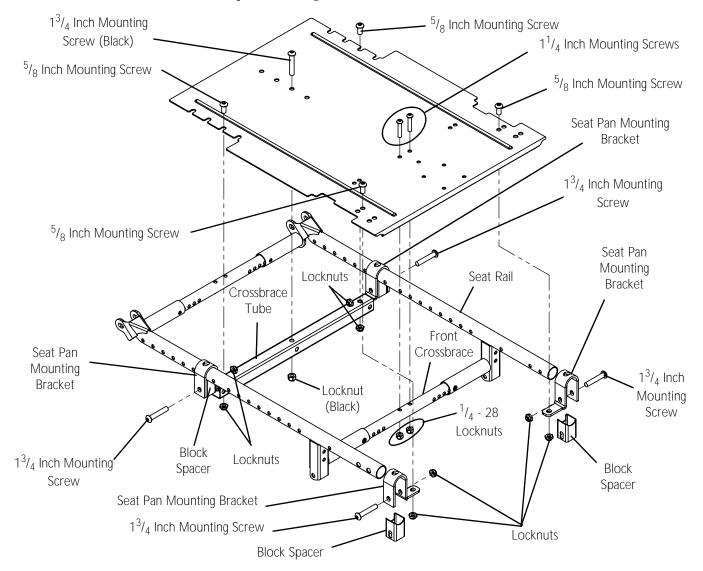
Converting from Drop Mount to Flush Mount (18 - 22 Inch Deep Seat Frames) - Remove Seat Pan
